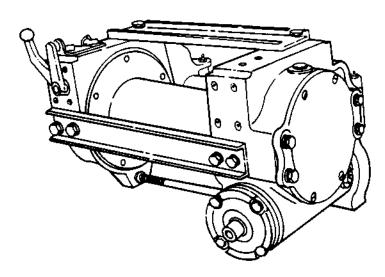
Front Winch Assembly (Without Level Wind and Cable Tensioner) (M39 and M809 Series Vehicles).
